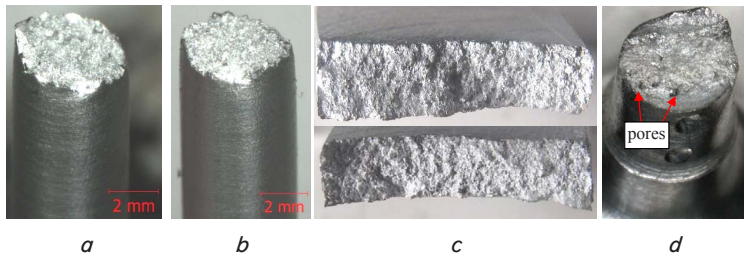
Fractures in specimens after mechanical testing: fracture of specimen No. 1 (a), fracture of specimen No. 2 (b), fracture of specimen No. 3 (c), fracture of specimen No. 1.6 with pores (d)
